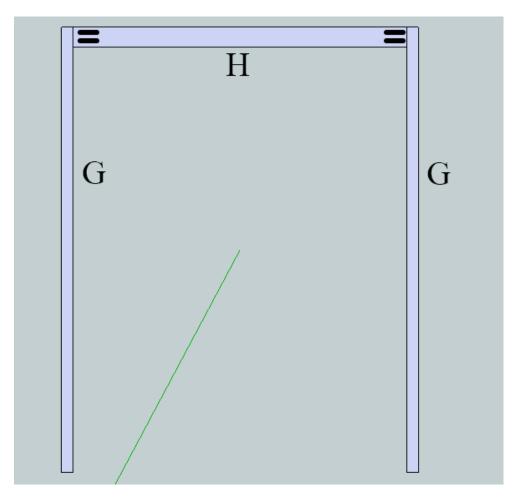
Top Cabinet Face Frame Arrangement and Pocket Hole Locations
